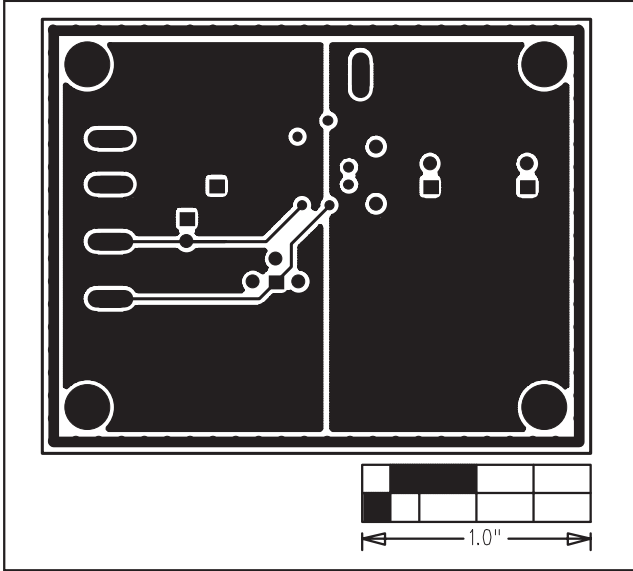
MAX9700B EV Kit PC Board Layout—GND Layer 2
